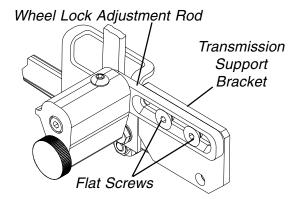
ADJUSTING WHEEL LOCK ASSEMBLY POSITION
